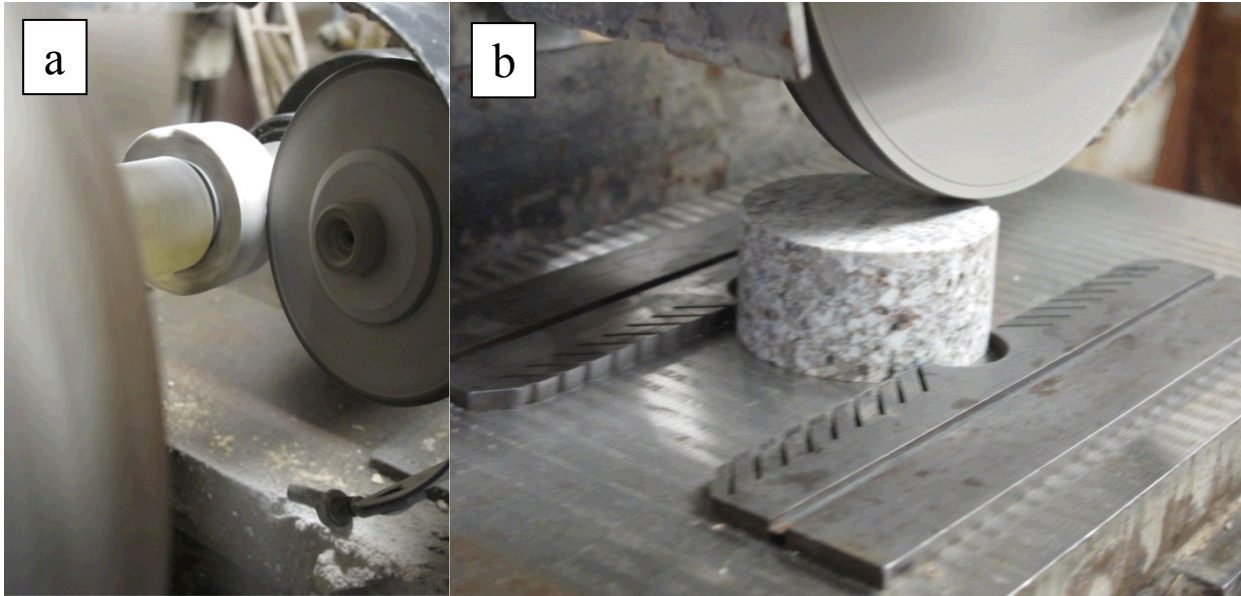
Sample preparation steps: a) turning core down to 50.8 mm on a lathe and b) grinding ends to tolerance.
